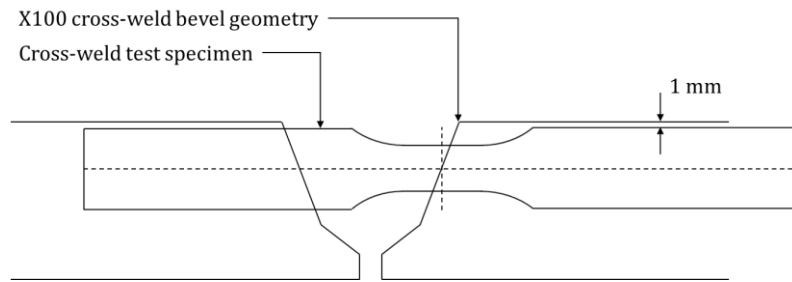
Cross-weld location within X100 cross-weld test specimens.
